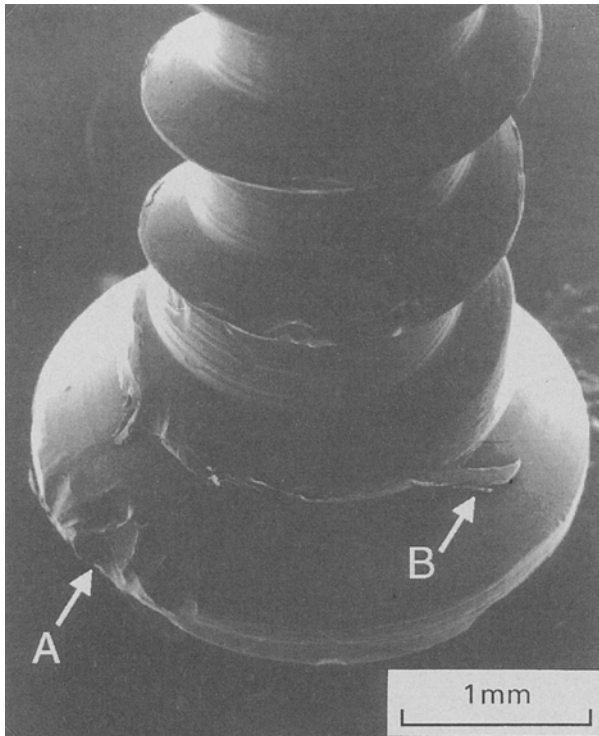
Handling defects (A) of a stainless steel screw, also showing metal splinter under the screw head (B).
